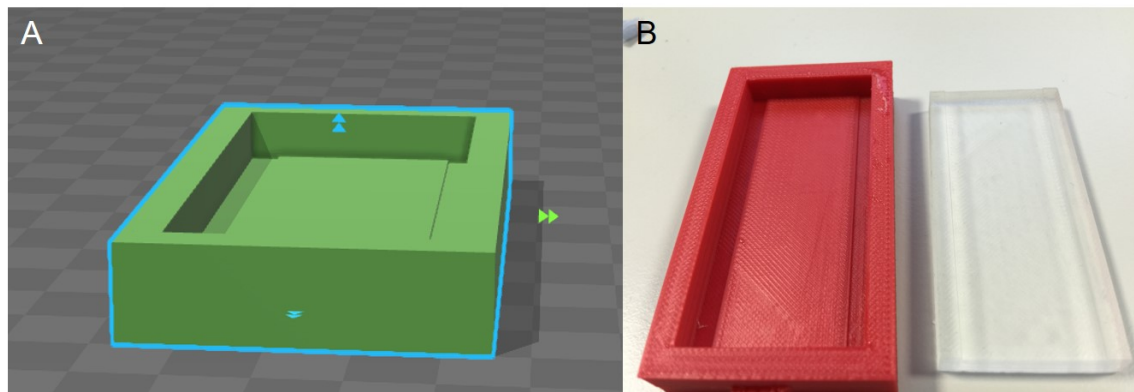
3D printed mould used in model two. A. The design images of the 3D mould. B. On the left, the mould printed; on the right, the PDMS gels made from the mould.
